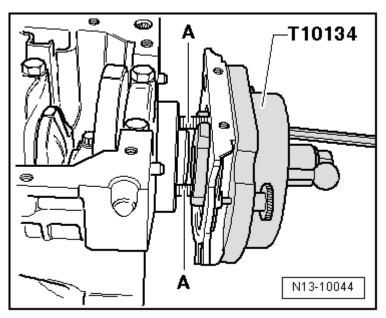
Identifying Assembly Tool T10134 Secured Onto Crankshaft Flange Using Socket Head Hex
